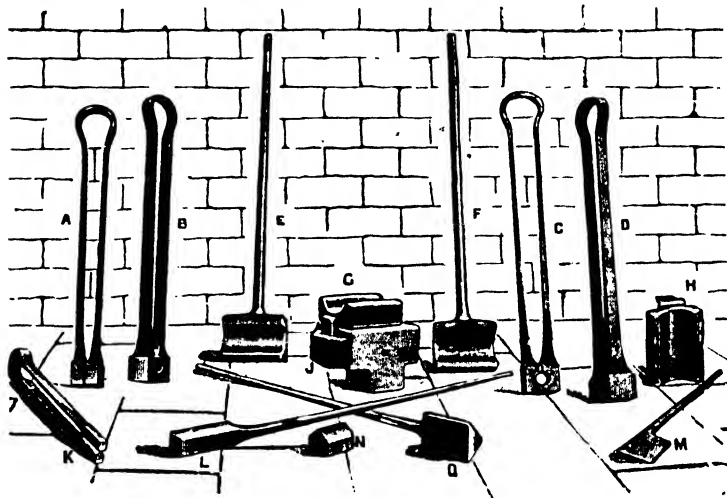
TOOLS FOR USE WITH STEAM AND AIR HAMMERS
